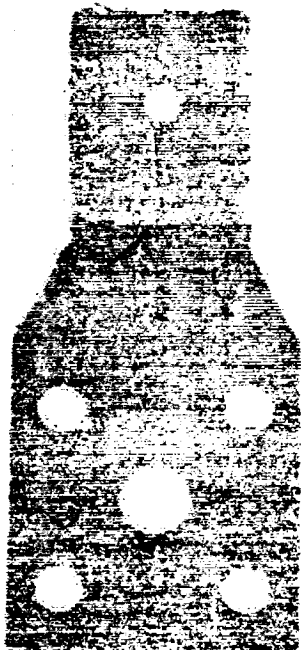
TYPICAL FAILURE MODES OF DAMAGE AND DEBOND SPECIMENS
